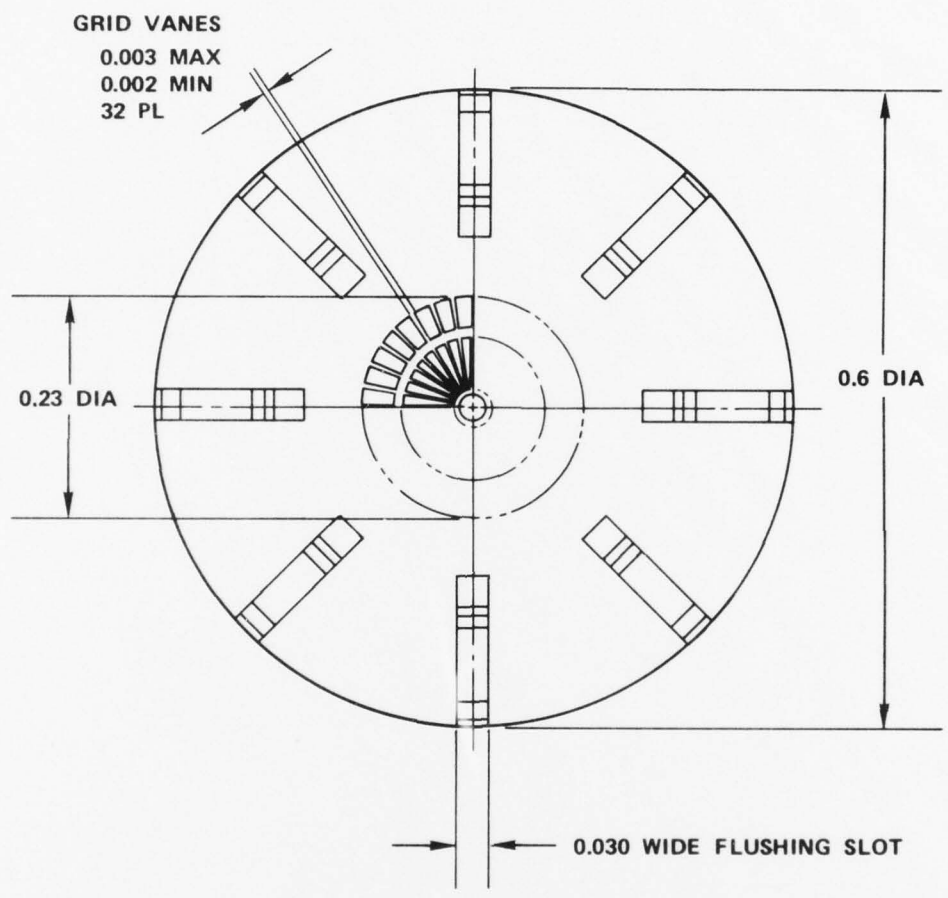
TOP VIEW OF MACHINED SANDWICH GRID
